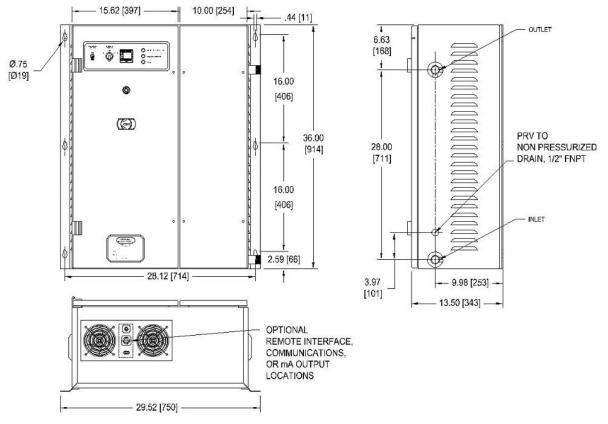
Dimensional Drawing, 12kW – 48kW Units
